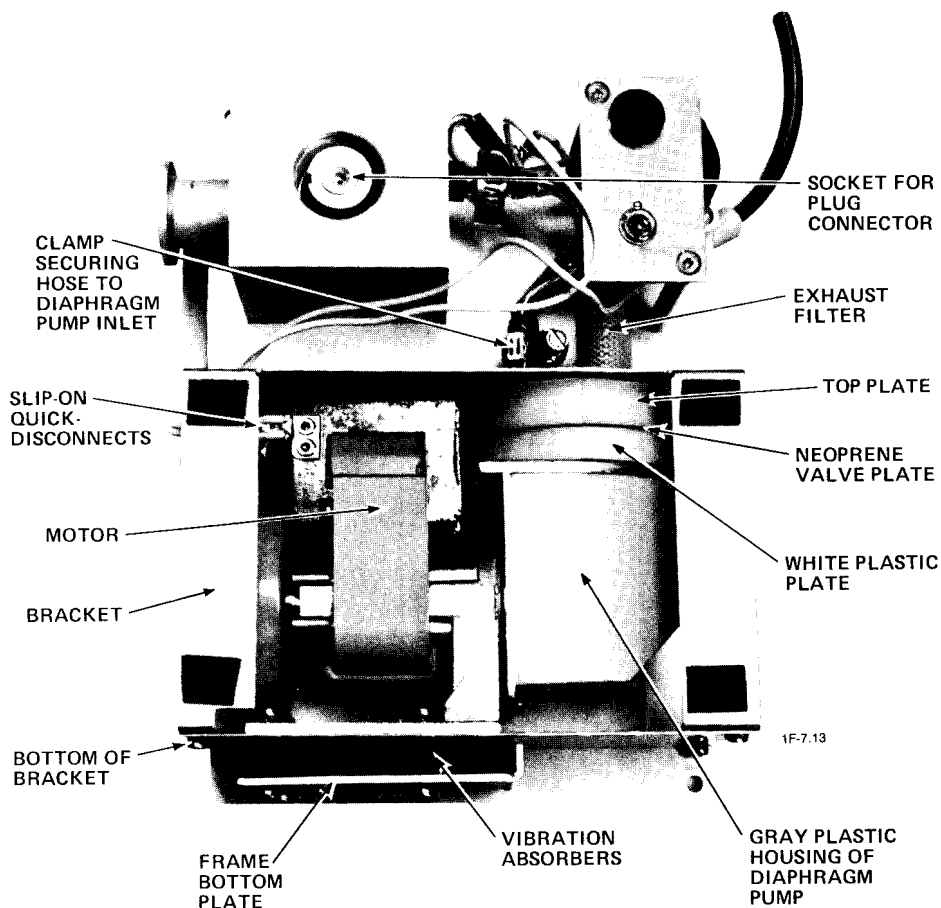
Diaphragm Pump Installed in Gas Transfer Unit of QUICK-TEST
